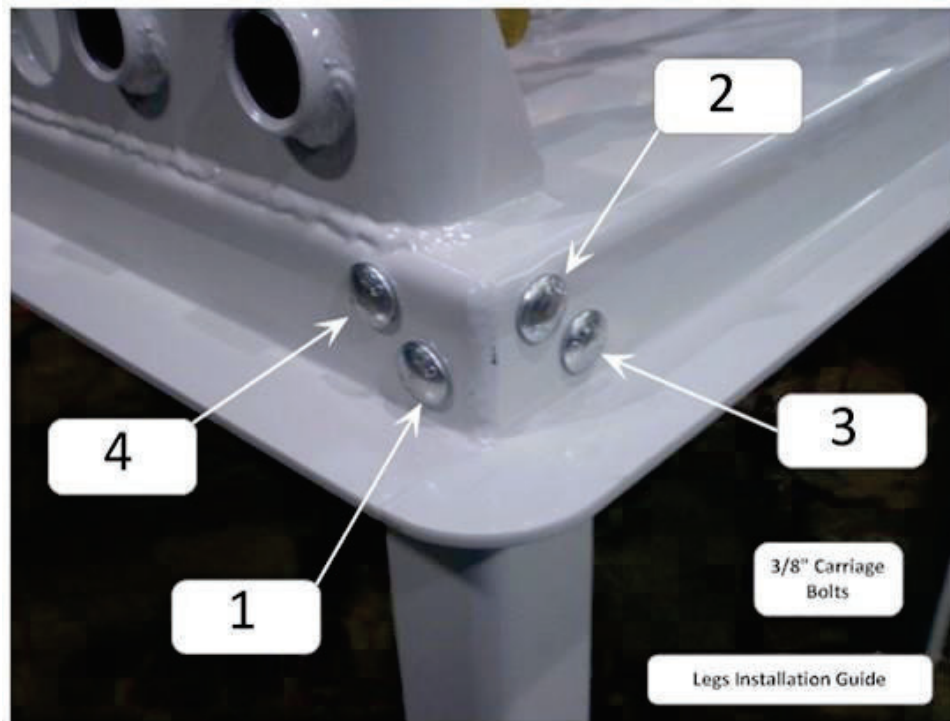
Bolting sequence to attach legs to the GREEN MACHINE base
